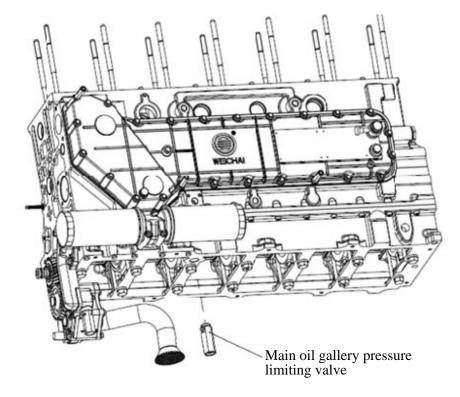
Exploded view of main oil gallery pressure limiting valve
